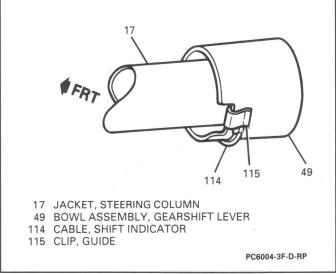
Guide Clip to Gearshift Lever Bowl Assembly
